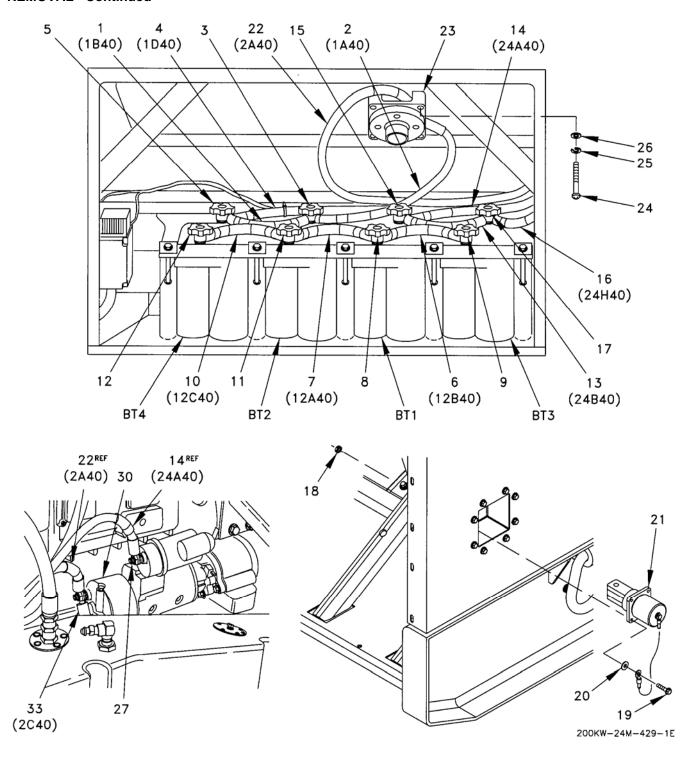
Battery Cable Assemblies (Sheet 1 of 2).
